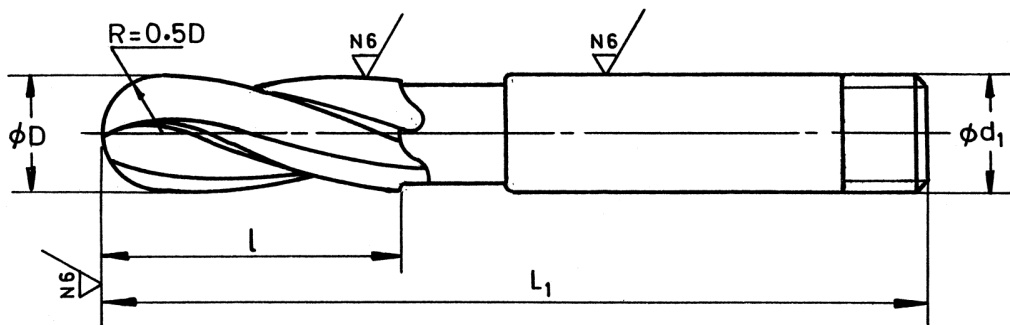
DIMENSIONS FOR END MILLS WITH PARALLEL SHANKS — (Continued)
